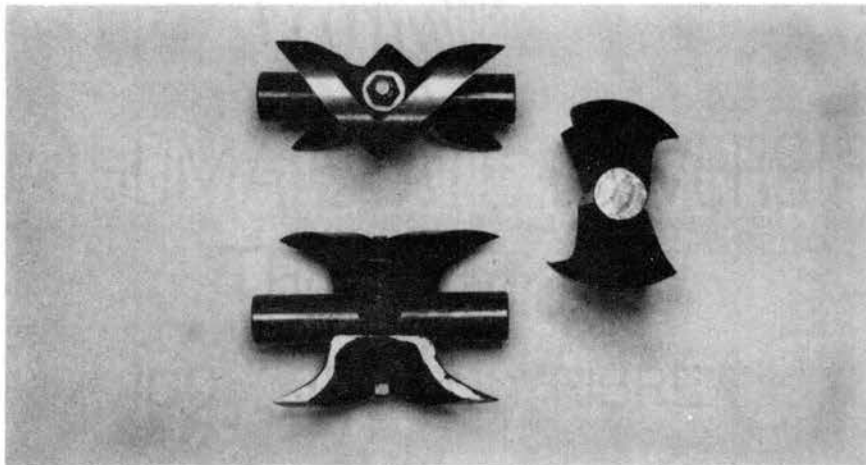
Top, Front, and Side Views of a Pair of Cutters Mounted on the One Inch Shaft
